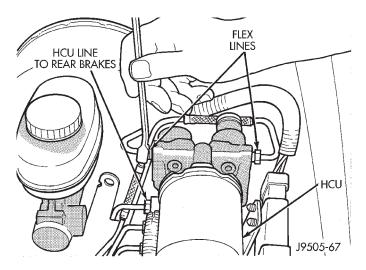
Location Of HCU Flexlines And HCU Line To Rear Brakes
